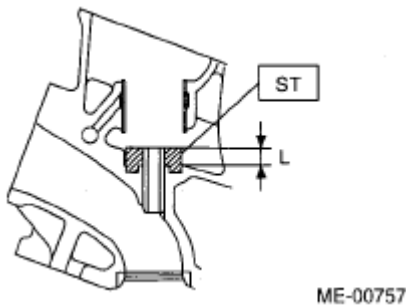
Identifying Valve Guide Adjuster ST 18251AA020 On Cylinder Head
